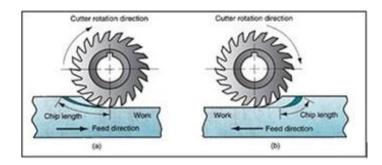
two forms of peripheral milling (a) up milling (b) down milling
